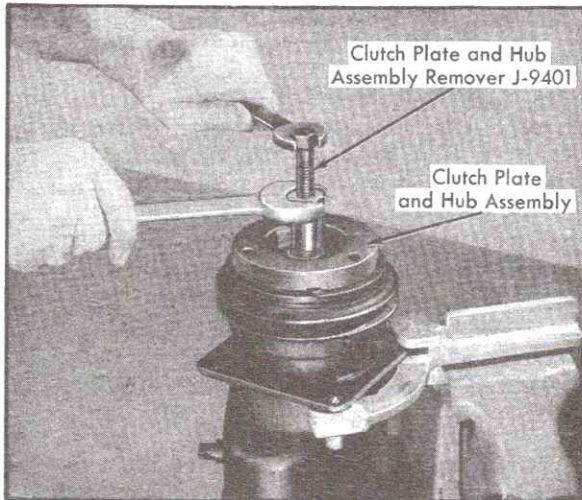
Removing Clutch Plate & Hub Assembly
